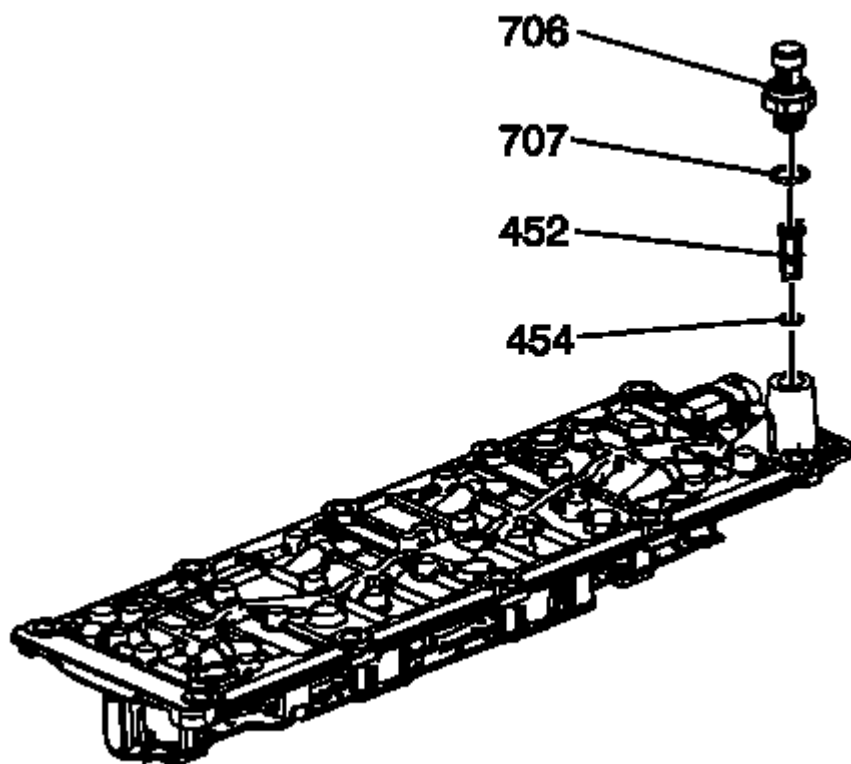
Removing/Installing Oil Pressure Sensor & Washer
